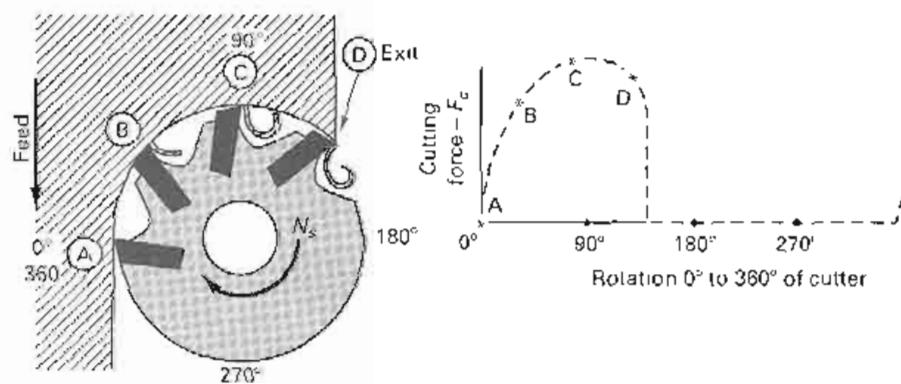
Conventional face milling (left) with cutting force diagram for F_c (right) showing the interrupted nature of the process. (From Metal Cutting Principles, 2nd ed., Ingersoll Cutting Tool Company.)
